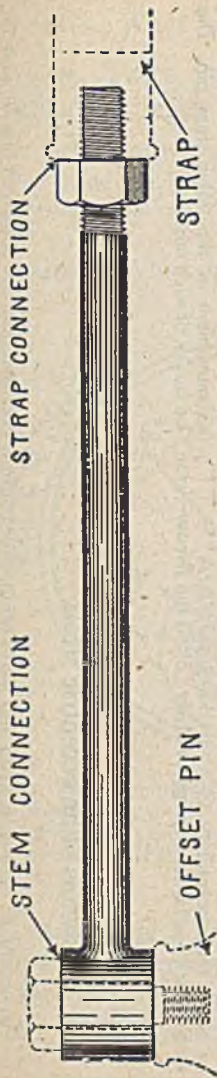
Plain eccentric rod having threaded connection for eccentric strap, and an eye for the valve stem pin.
